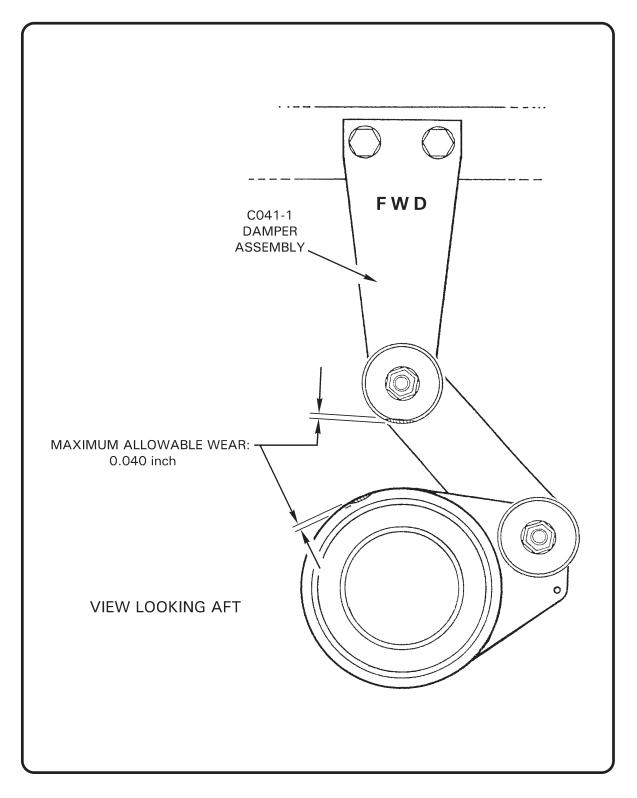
TAIL ROTOR DRIVE SHAFT DAMPER BEARING INSPECTION
